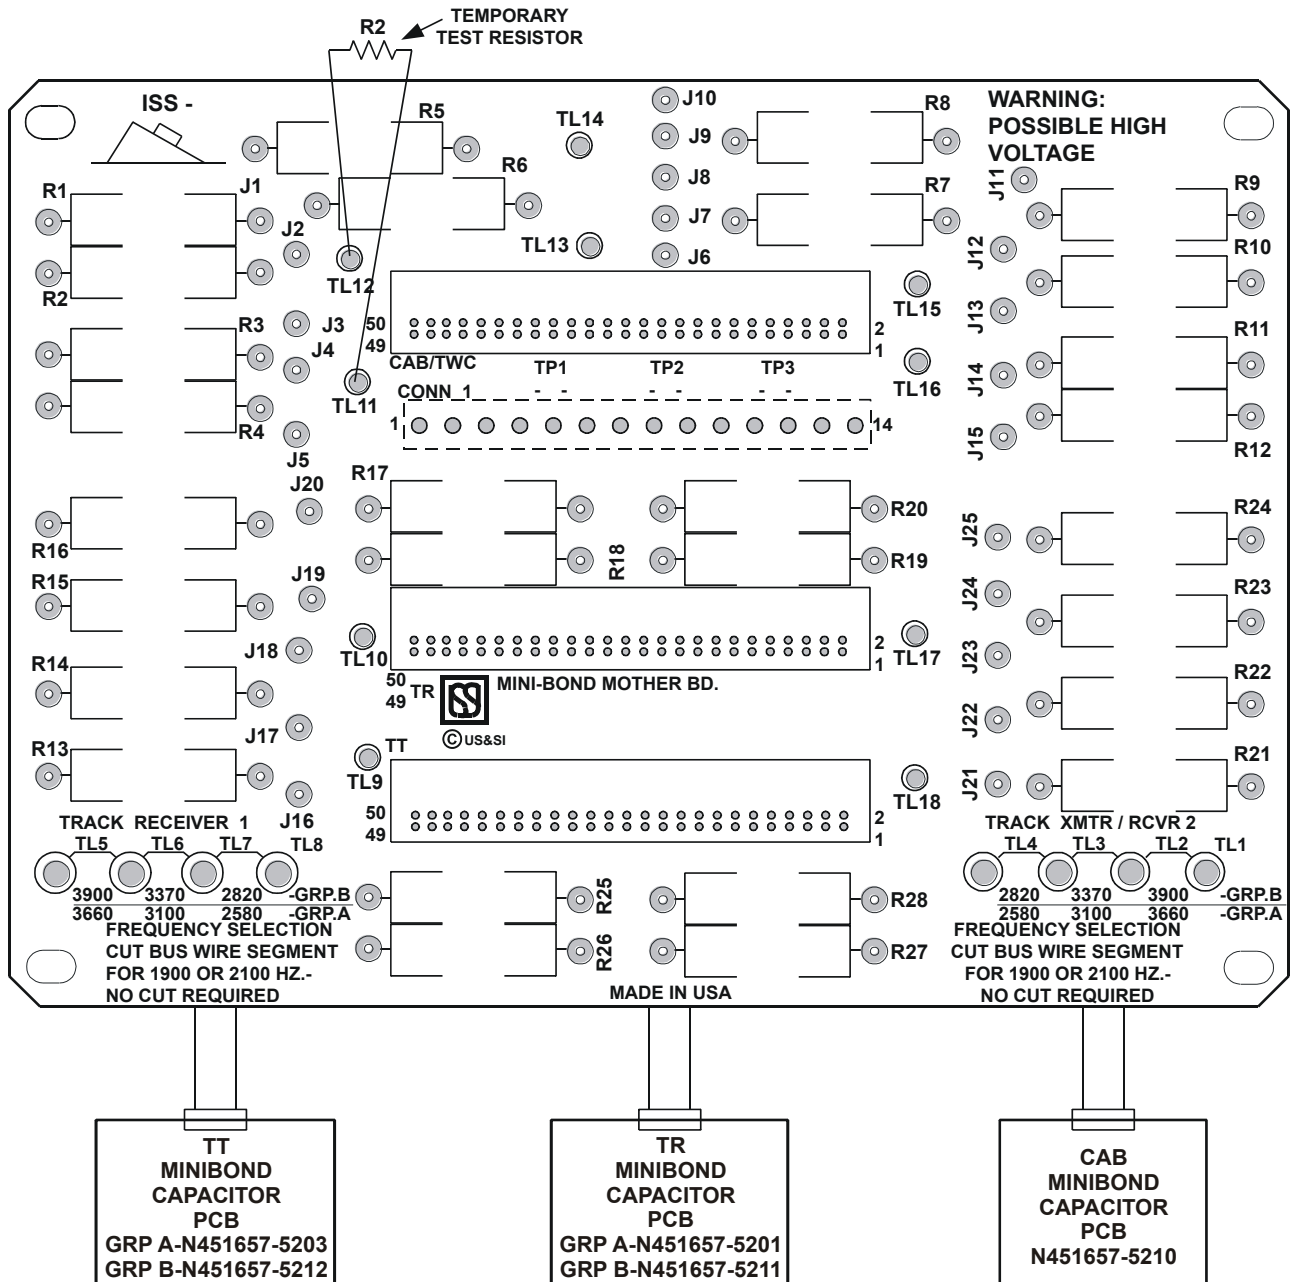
Tuning Circuit Test Set-Up and Mother Board Layout
